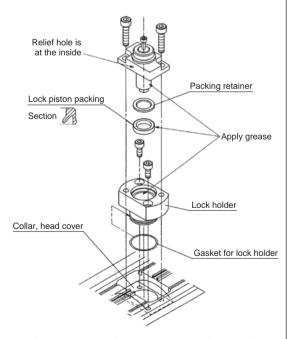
Reassembling of end lock part (Ø80, Ø100)
